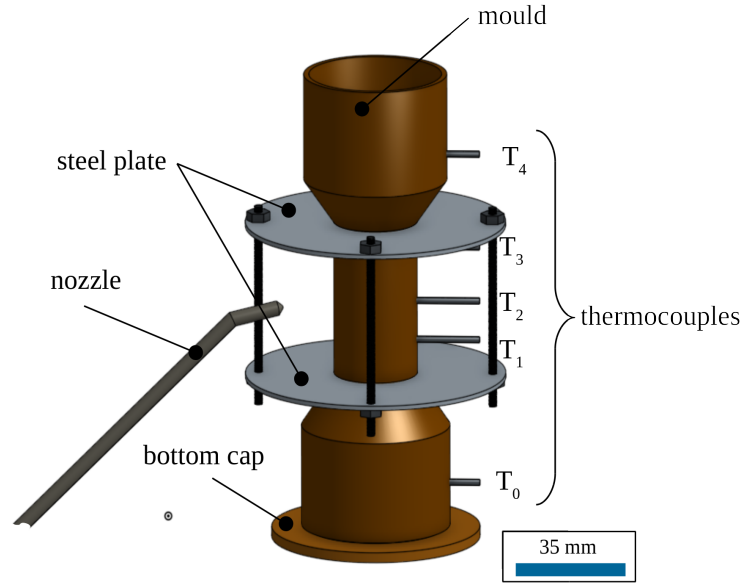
Geometry of dumbbell-shaped casting with natural cooling condition.
